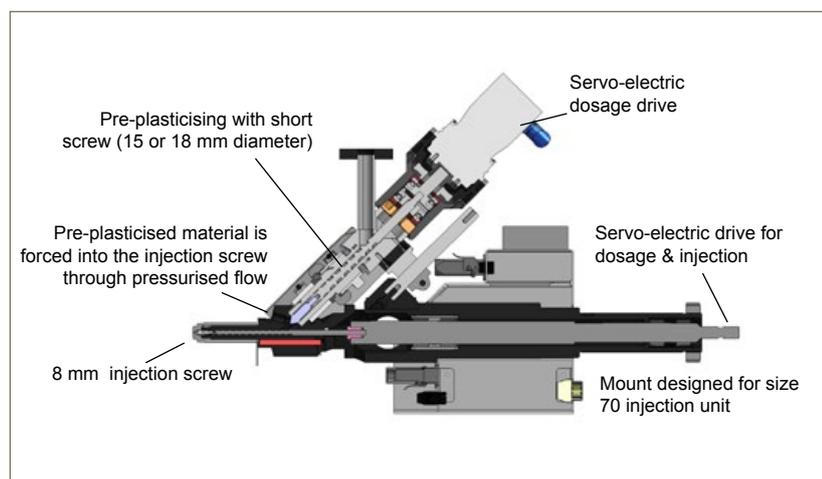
Micro-injection module with pre-plasticising system and 8 mm injection screw. Image ARBURG
